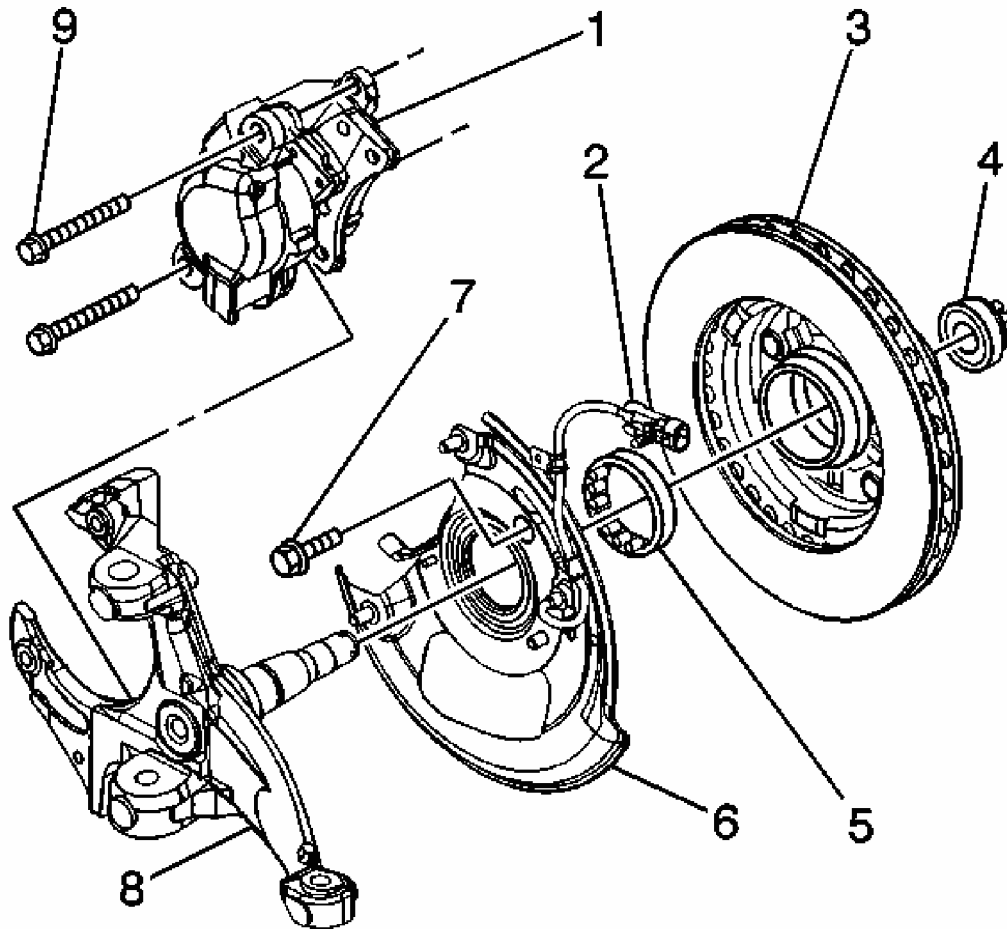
Locating Wheel Speed Sensor (RWD Pickup)
